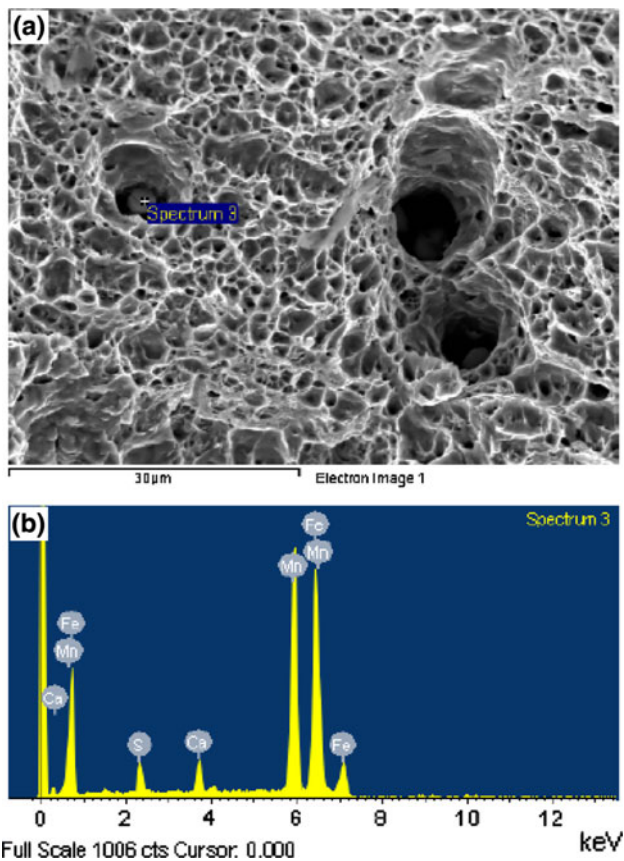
EDS analysis of particles in the dimples on the fracture surface of a laser-welded DP980 steel joint. (a) A SEM image with larger and deeper dimples and (b) EDS spectrum
